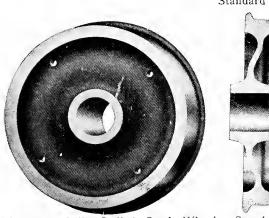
Solid Rolled Steel Wheel. Standard Steel Works Company.
